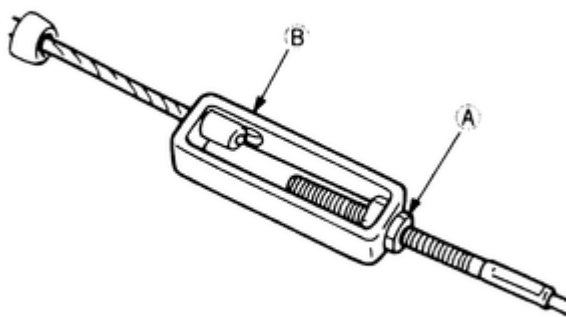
Grasp the unthreaded portion of the parking brake cable adjuster with locking pliers, while turning the adjusting nut — Pathfinder
